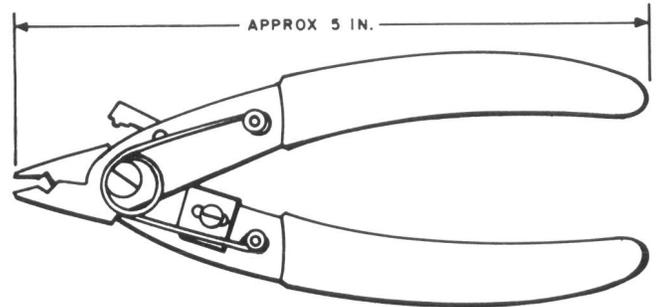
R-3088 Plier-Type Wire Stripper Tool
